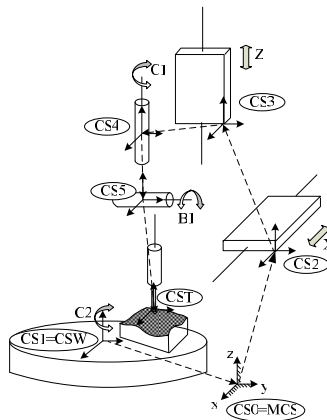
Kinematics model of 5-axis turn-milling machine tool
